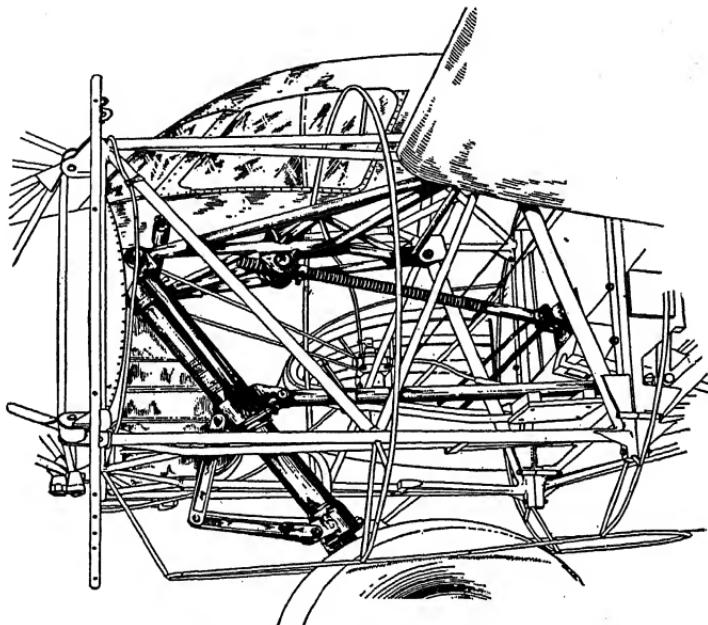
Landing gear and retracting mechanism of Cessna T-50.
